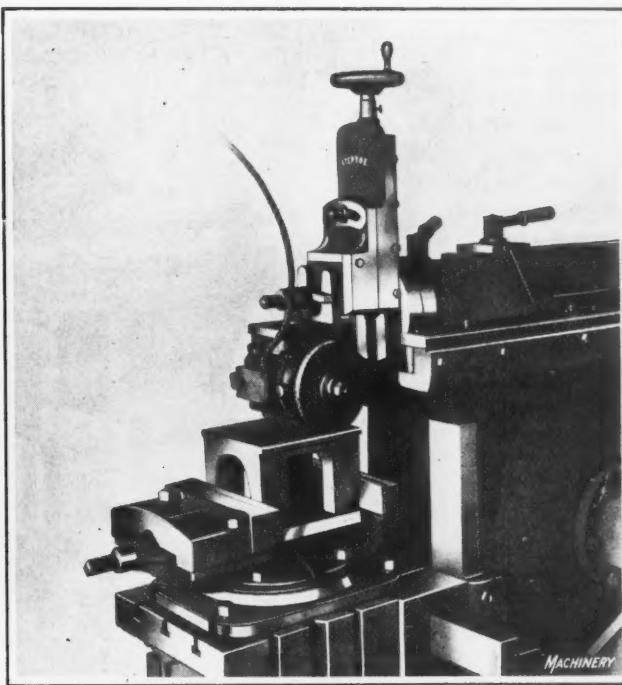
Shaper furnished with Portable Grinding Machine in the Toolpost for performing Surface Grinding Operations on Small Work
